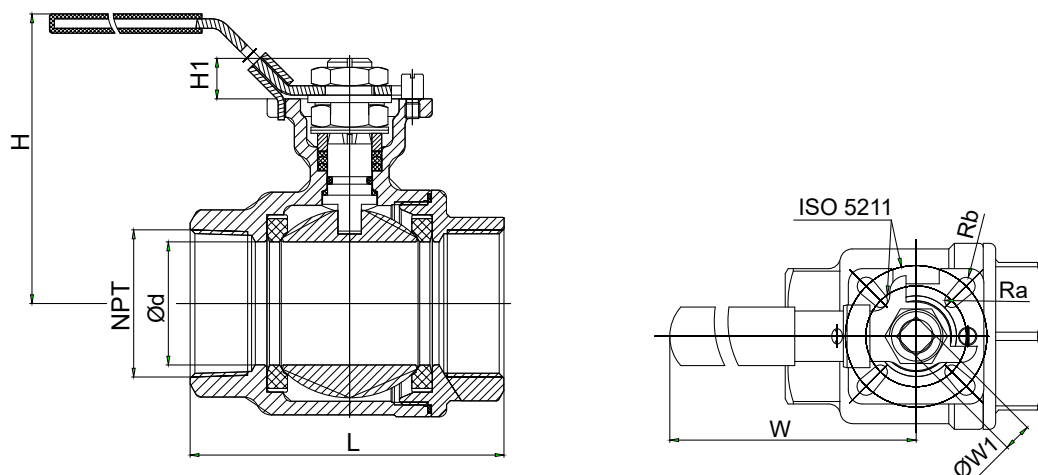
Dimensions and weights of ECOLINE BLC-P2D
